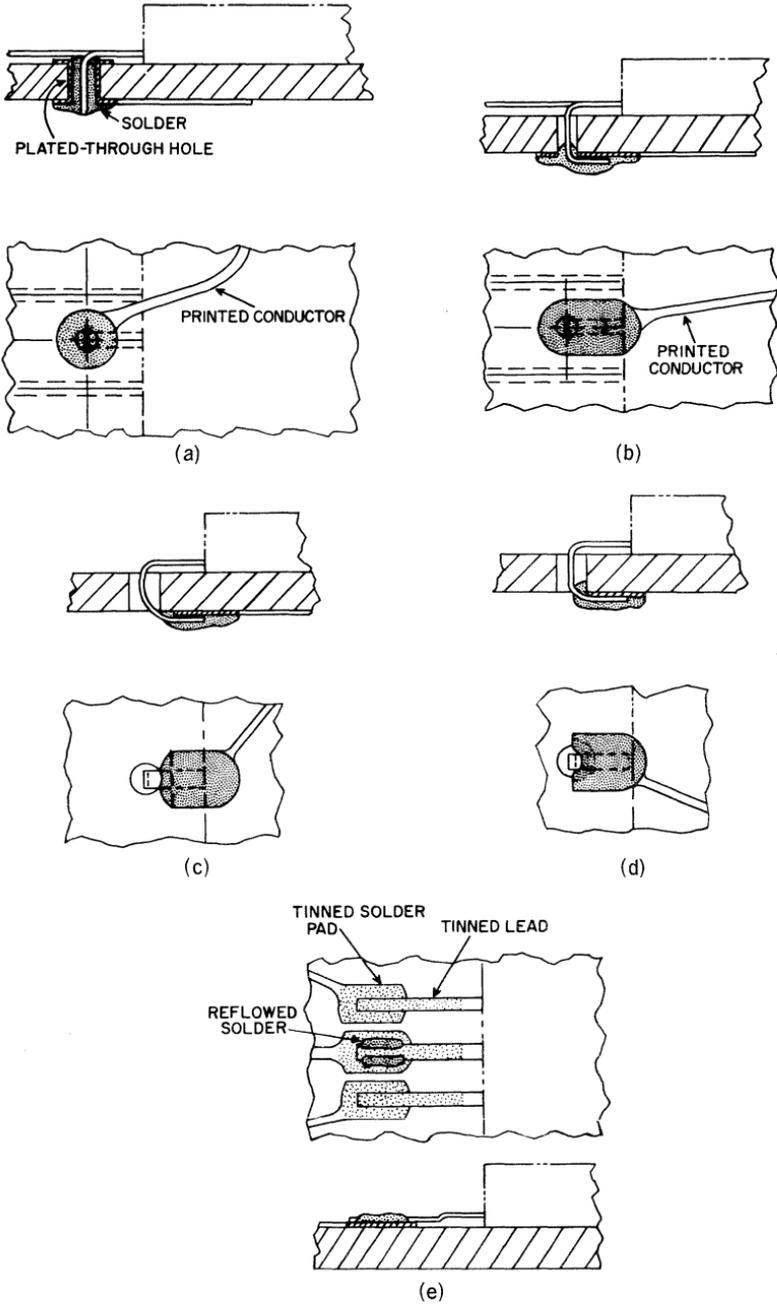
Interconnection methods for RCA 14-terminal ceramic flat packs: (a) straight-through method; (b) clinched-lead full-pad method; (c) clinched-lead offset-pad method; (d) clinched-lead half-pad method; (e) surface connection method (reflow soldering).
